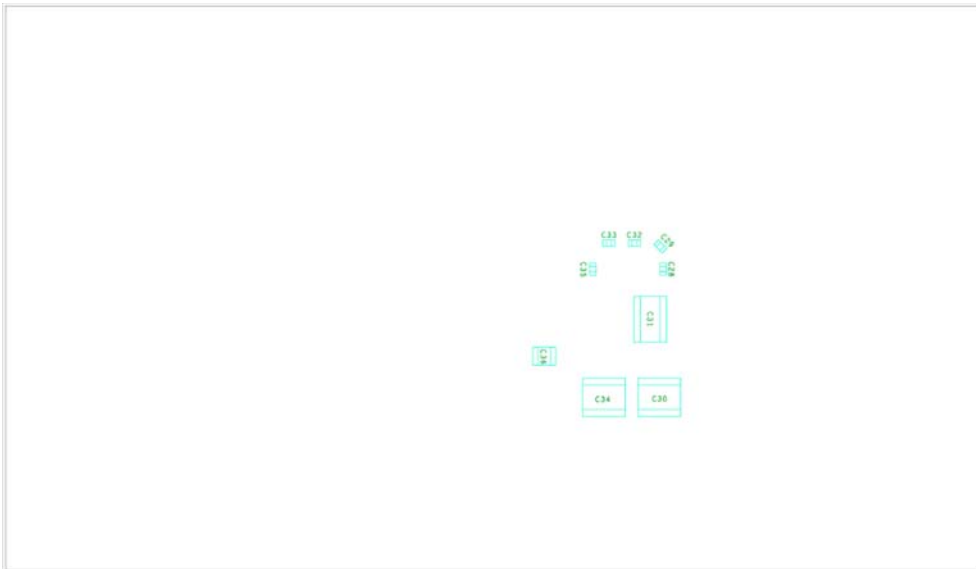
BOTTOM SIDE ASSEMBLY DRAWING
